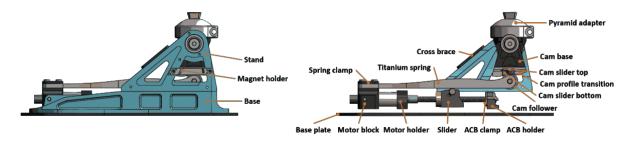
On the left is a sagittal plane view of the DESR foot with the frame components highlighted. On the right is the sagittal view as well, but here the internal geometry is more visible. All the machined parts, the cam follower and the pyramid adapter are pointed out.
